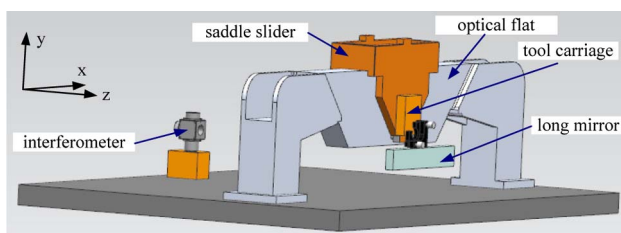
Optical layout of the measurement of the stability of the tool carriage.
